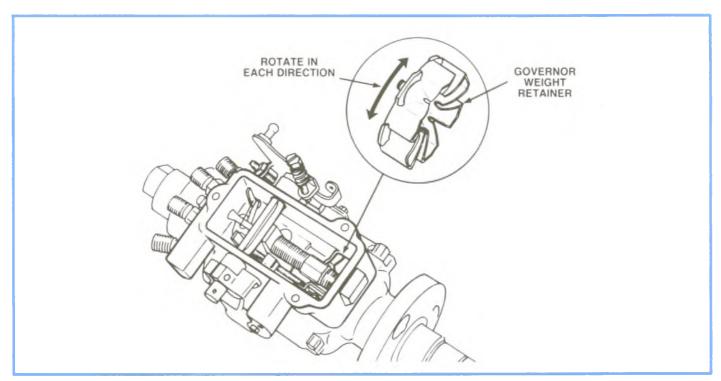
, Failed Governor Weight Retainer Ring Checking Procedure.
